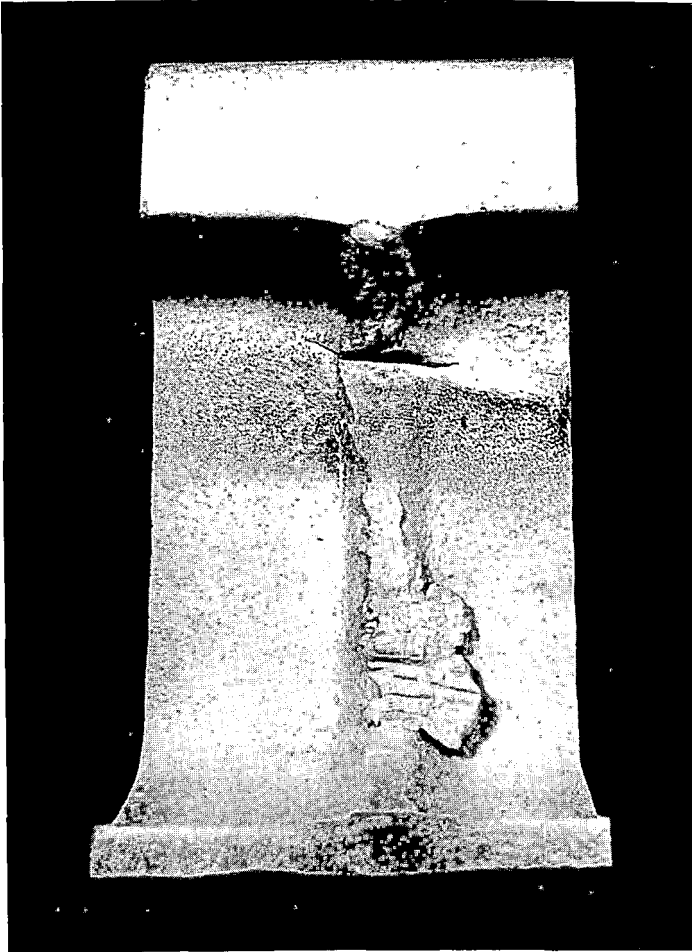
A crack in the upper fillet radius which has initiated at a chisel mark
